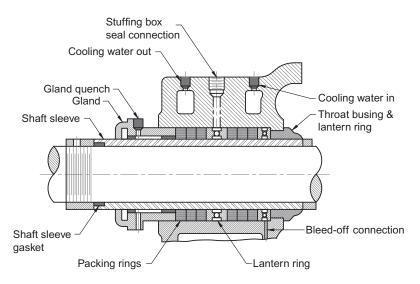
Conventional stuffing box illustrating a "throat" lantern ring on the top and a "leak-off" type lantern ring at the bottom of the box.
